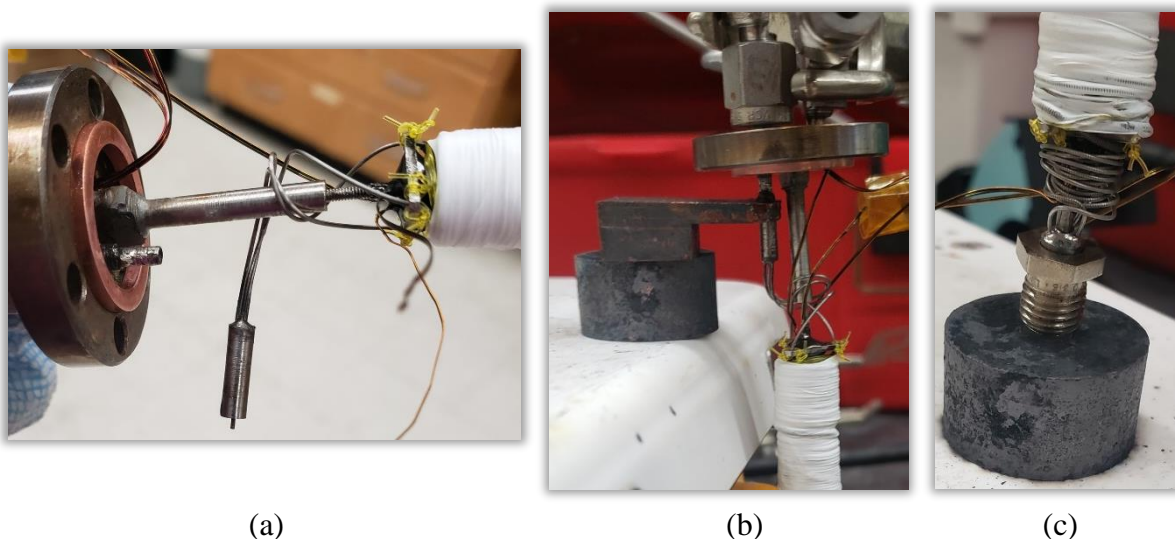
Soldering of the slip joint to the ConFlat (a and b) and solder of the heat exchanger tubing to JT orifice (c).
